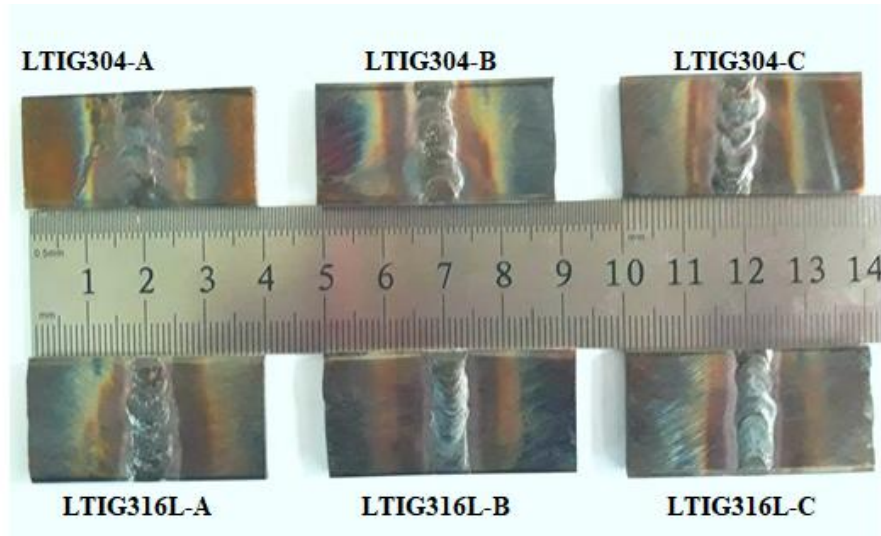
Welded specimens of AISI 304 and AISI 316L austenitic stainless steels. sample coding reflects the specimen's number, A, B and C
